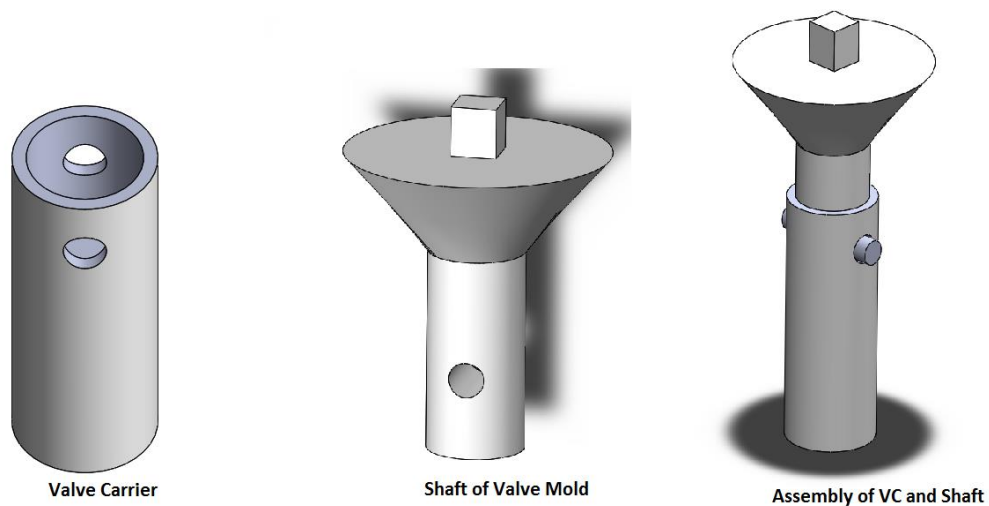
Valve Carrier, Shaft of the Valve Mold, and their fixation assembly that allows the rotational transition to the valve mold.
